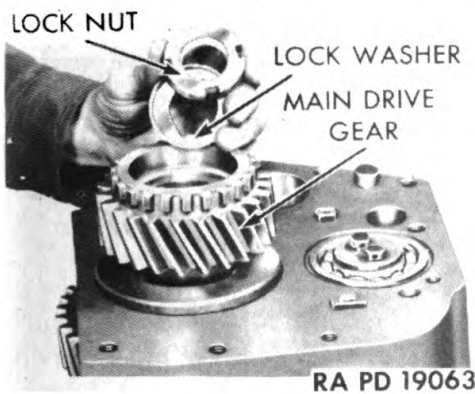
Main Drive Gear Lock Washer and Lock Nut — Removed
